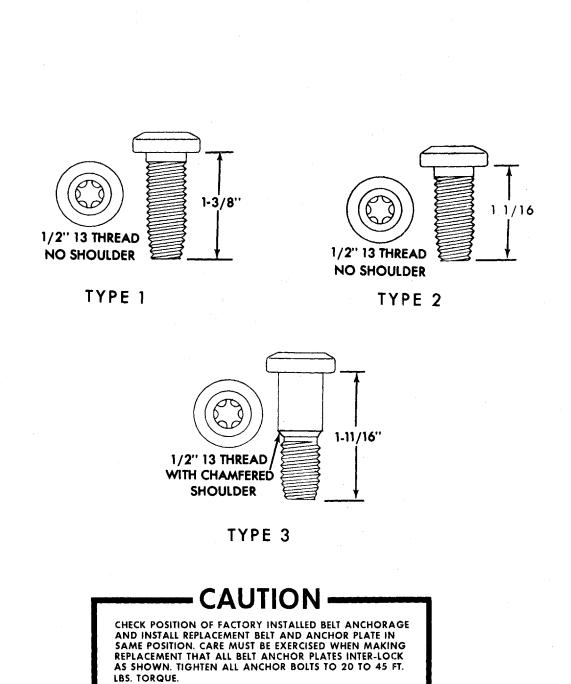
Rear Seat Lap Belt Anchor Bolts - F,H and X Styles
